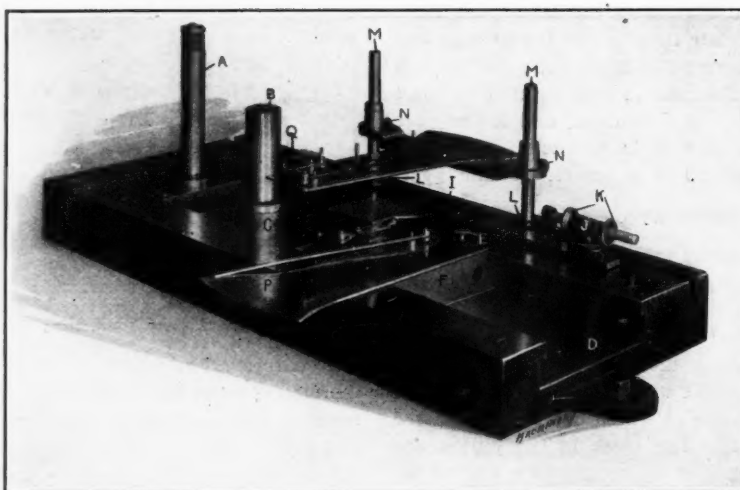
Device for testing Pitch Diameter, Concentricity of Bearings, Tooth Thickness at Pitch Line and Parallelism of Teeth with Axis of Gear
